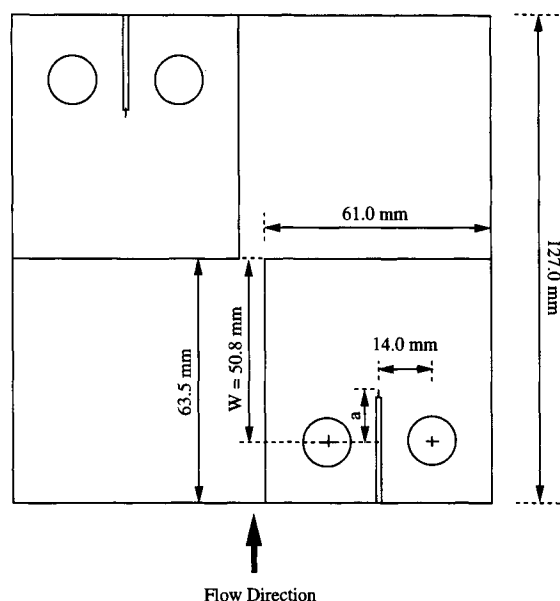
Diagram of compact tension specimens as machined from injection-molded plaques
